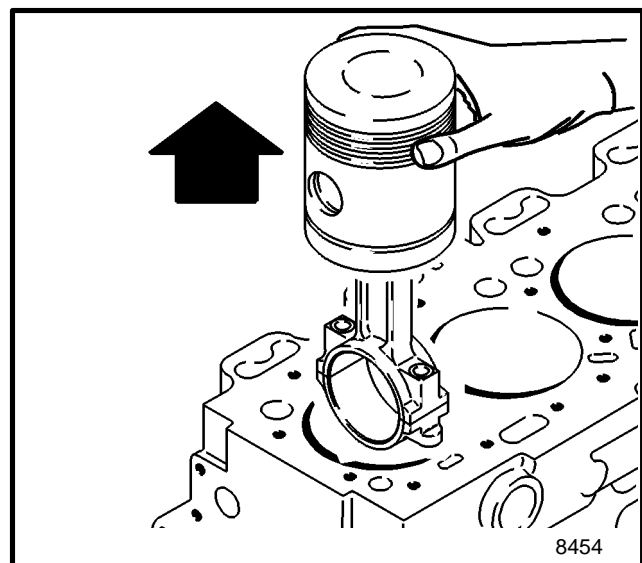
REMOVING THE PISTON AND CONNECTING ROD
